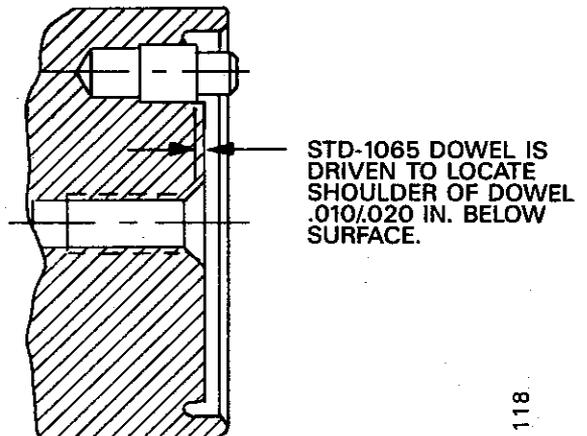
B. Section Thru End of Crankshaft Showing Driven Height of STD-1065 Dowel
